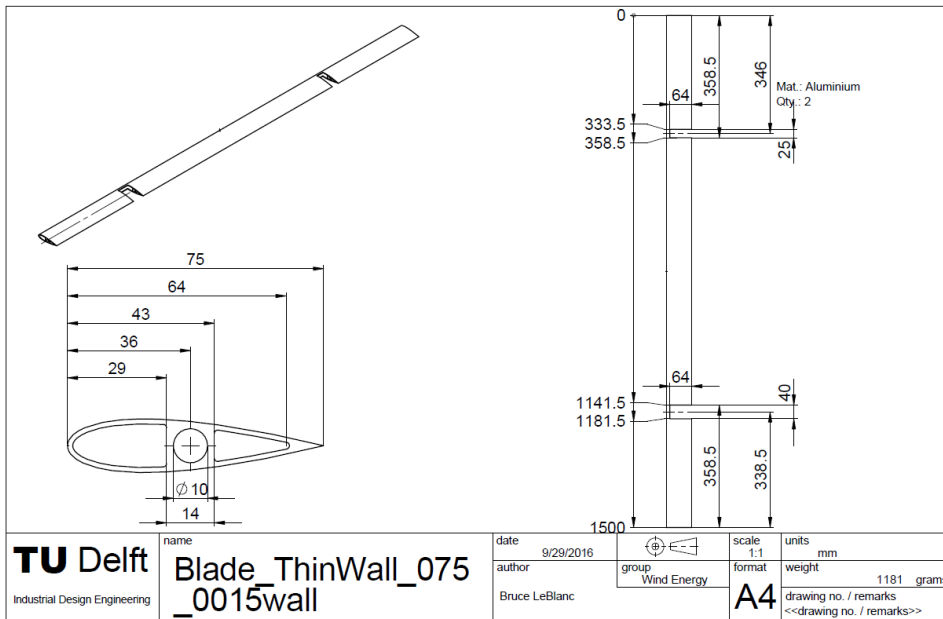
Drawing of PitchVAWT blades with cutouts
